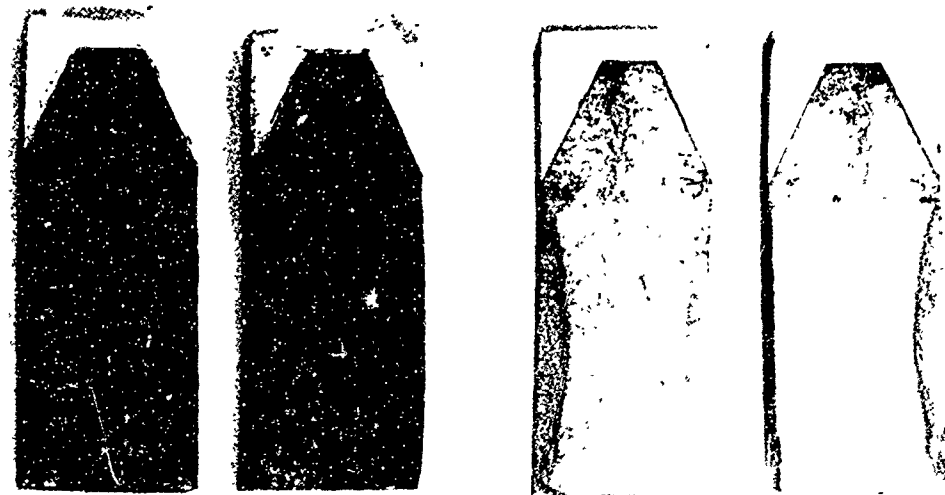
Macro appearance of 3 in. (7.6 cm) thick plates of
